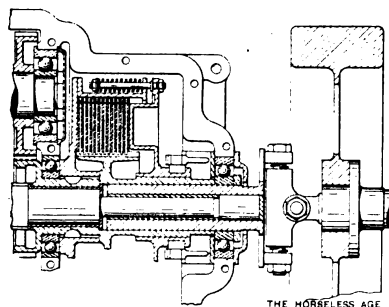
POPE-TOLEDO MULTIPLE DISC CLUTCH IN GEAR CASE.
